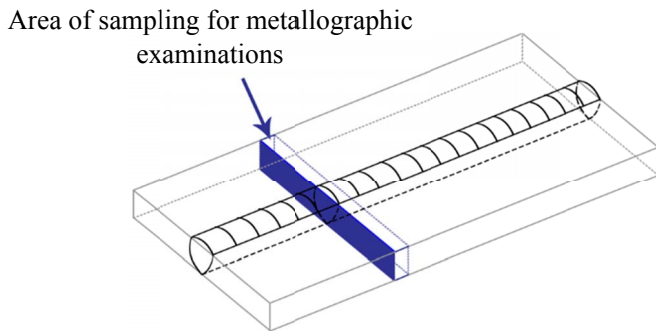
Diagram showing the sample cutting area for metallographic examinations of Inconel 617 welded joints
